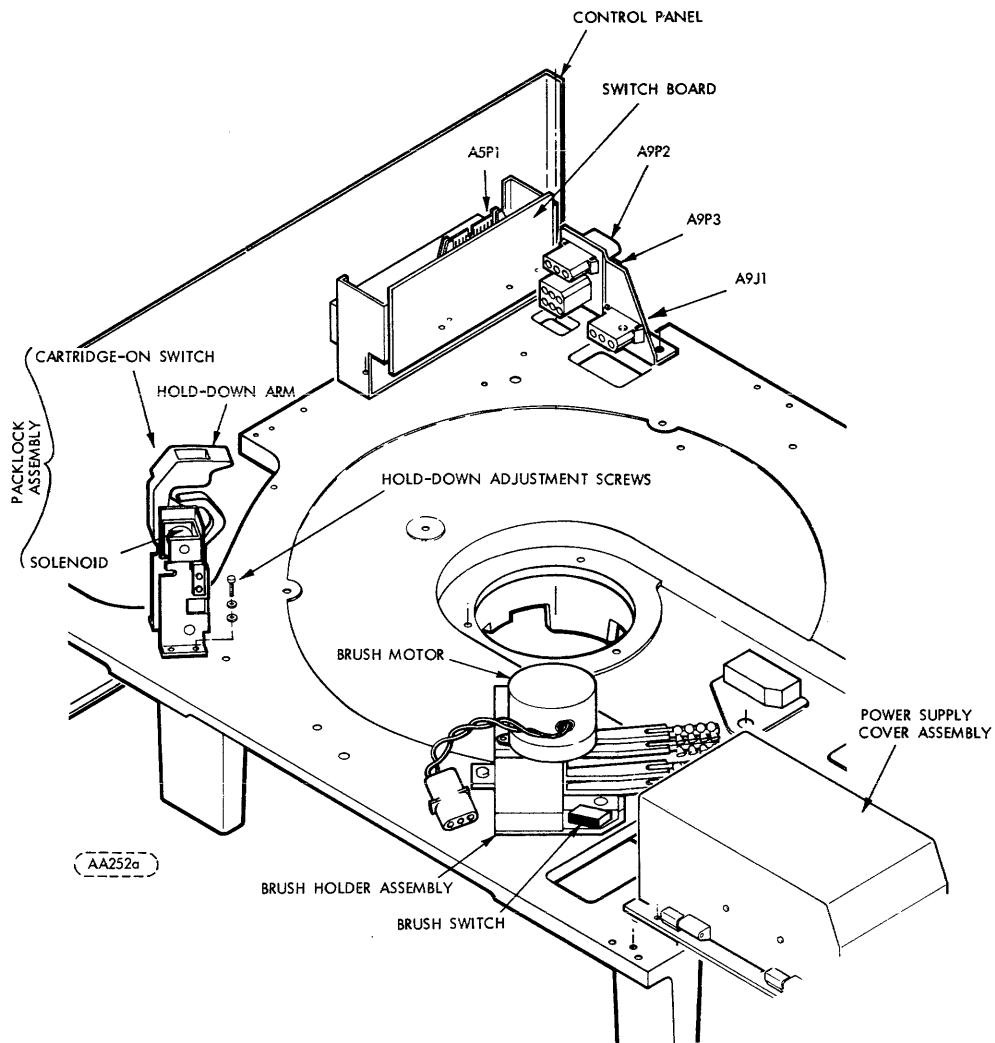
PACKLOCK AND BRUSH ASSEMBLIES
